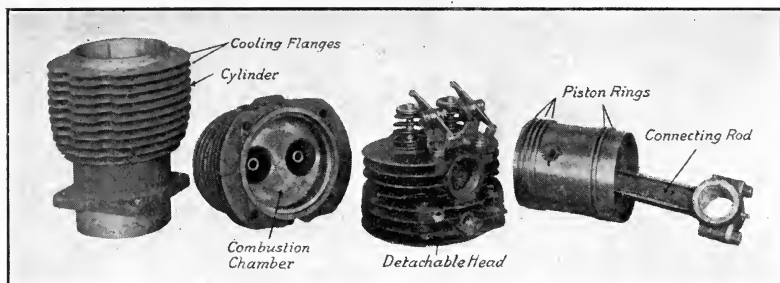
Parts of Air-Cooled Cylinder Showing Method of Seating Valves Directly in Detachable Cylinder Head, and Large Flanges on Both Cylinder and Head Member to Largely Increase Effective Radiating Surface.
